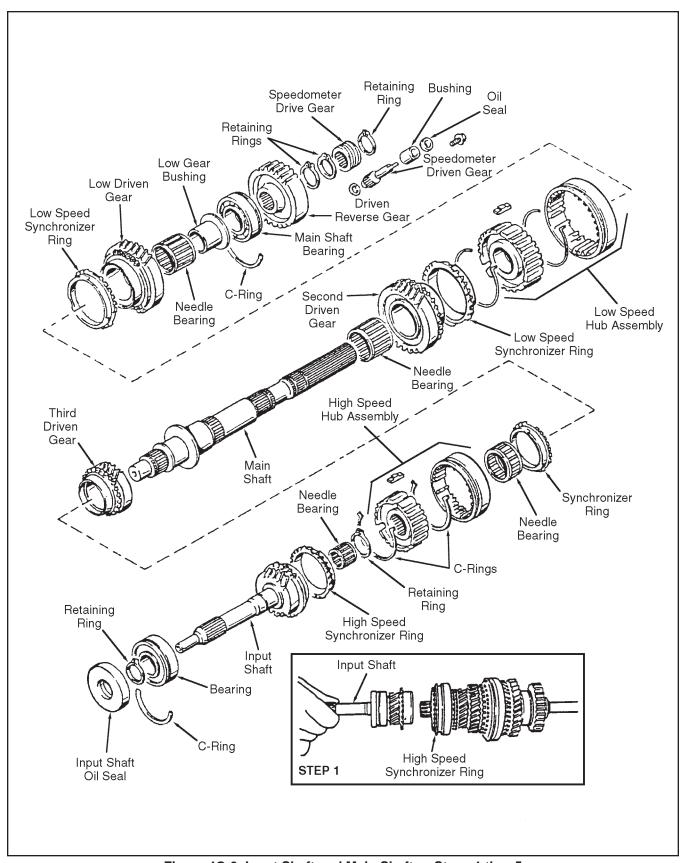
G-9. Input Shaft and Main Shaft — Steps 1 thru 5
